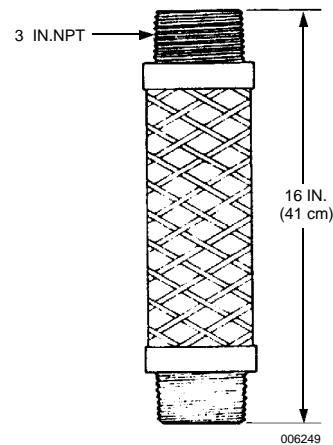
3 in. Valve Discharge Hose (Part No. 69990)
